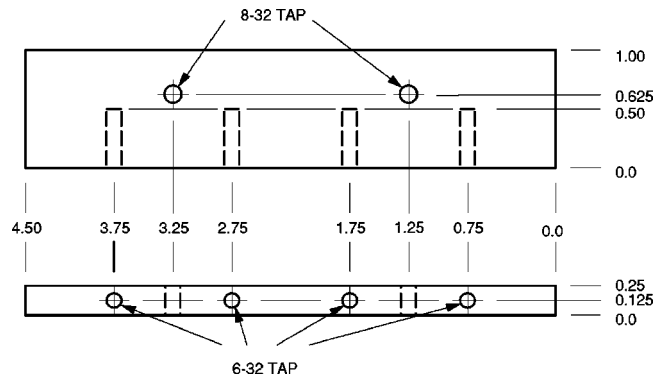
Single-photon counting module (SPCM) base adapter plate. Units: inches, all tolerances are  $\pm 0.01$  in. unless otherwise specified.
